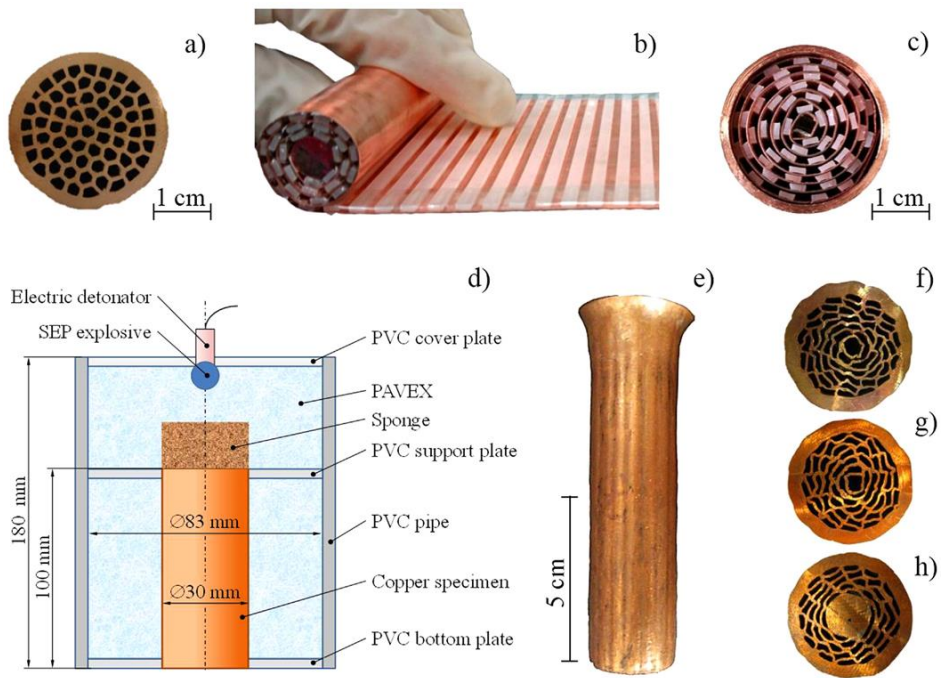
2 Original UniPore structure made of explosive compacted copper pipes (a), rolling of copper foil with acrylic spacer bars (b), rolled foil inserted into the copper tube (c), experimental assembly for explosive compaction (d), recovered sample after compaction (e), structure with internal wall thickness of 0.3 (f) and 0.4 mm without (g) and with centre copper core (h)<sup>42</sup>.
